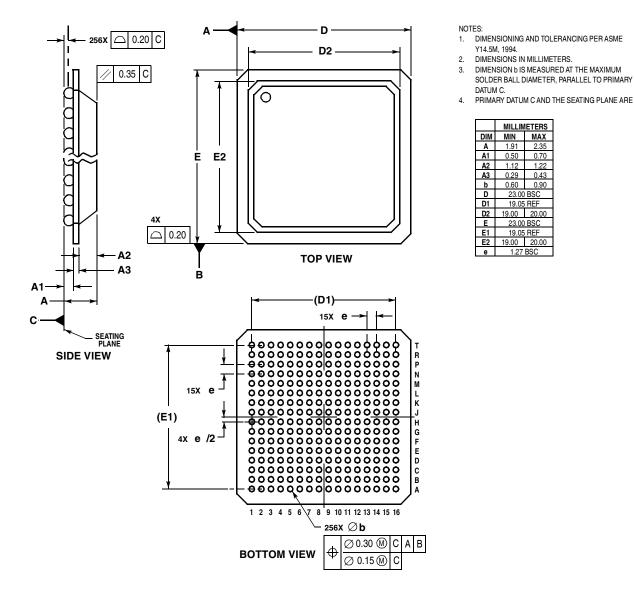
Package Dimensions for the Plastic Ball Grid Array (PBGA)-non-JEDEC Standard
